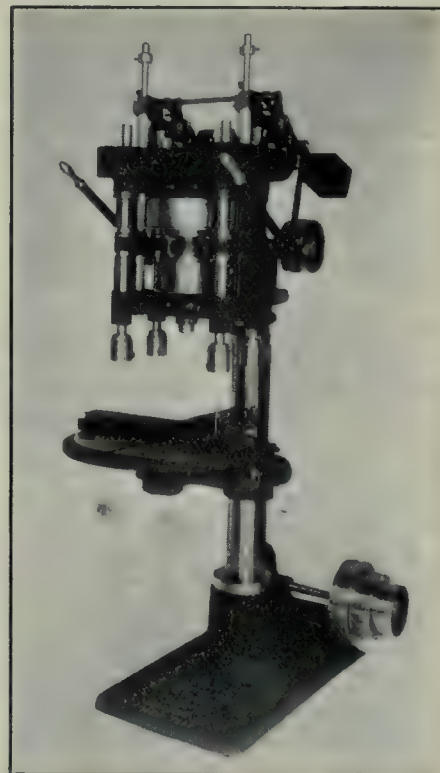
NO. 2-X FOUR SPINDLE AUTOMATIC TAPPING MACHINE.
